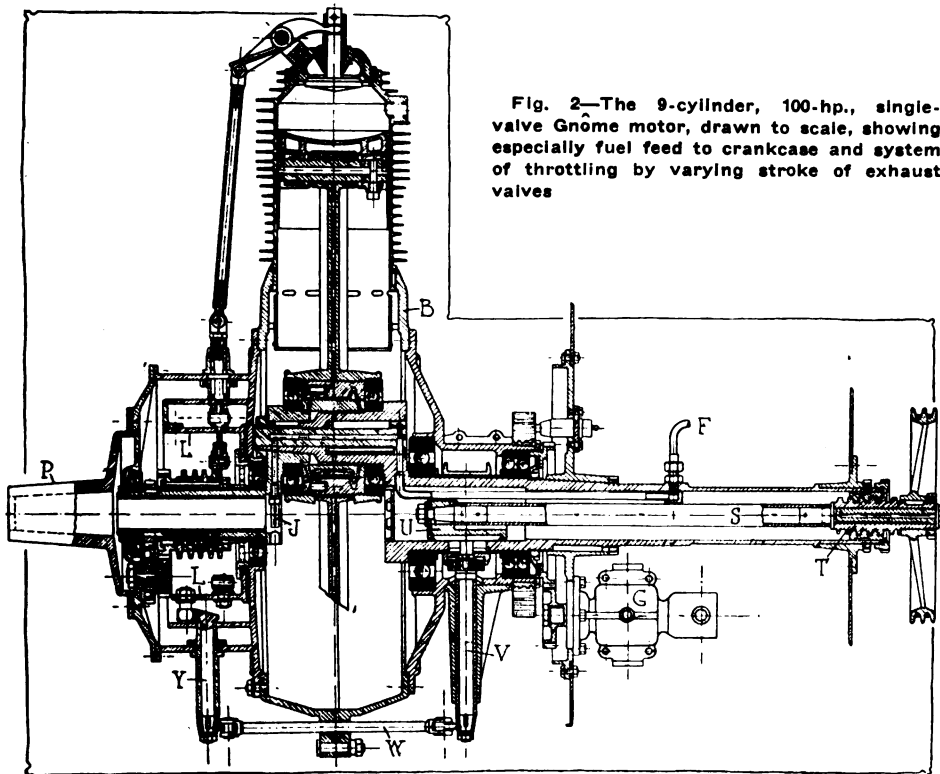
The 9-cylinder, 100-hp., single-valve Gnome motor, drawn to scale, showing especially fuel feed to crankcase and system of throttling by varying stroke of exhaust valves
